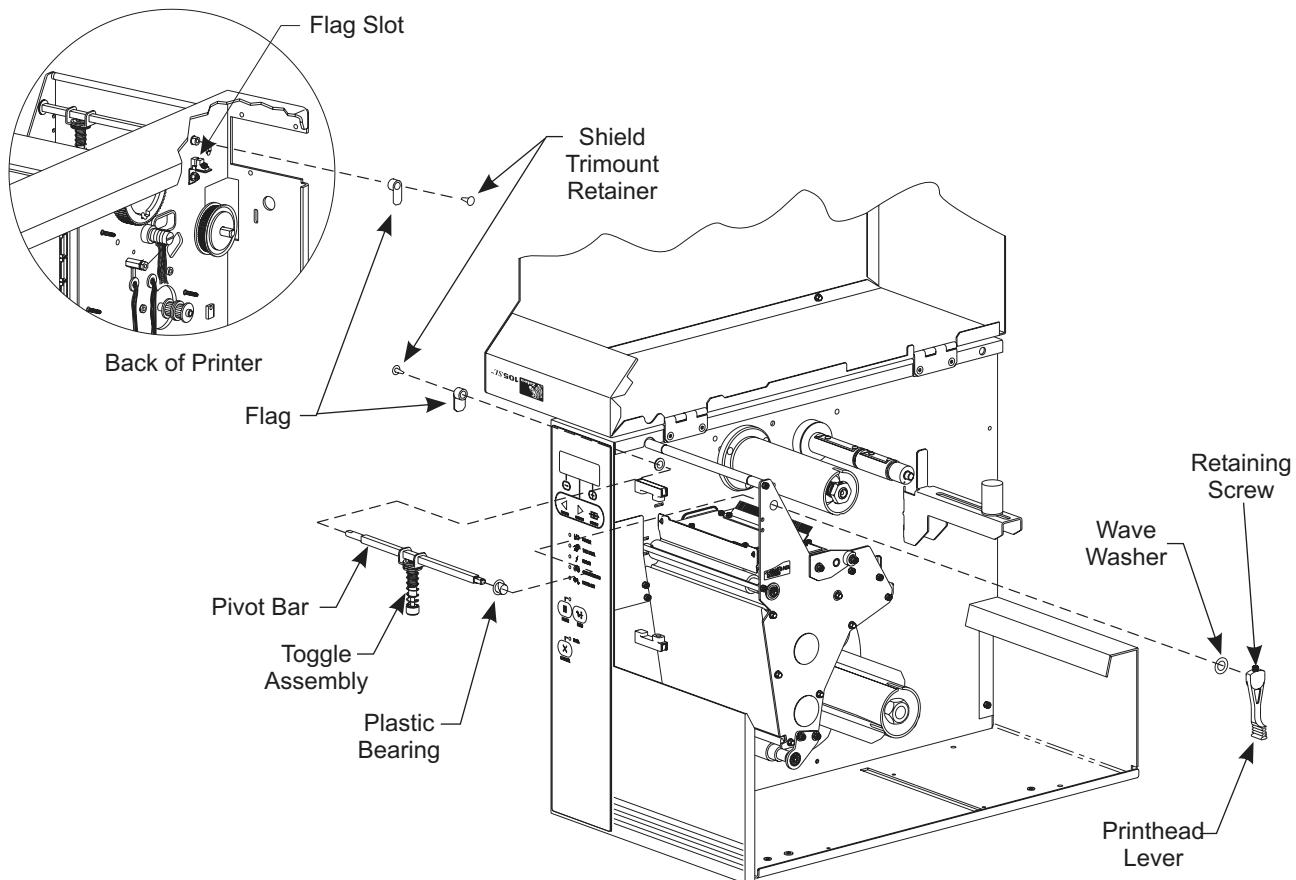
Pivot Bar, Handle and Toggle Parts
